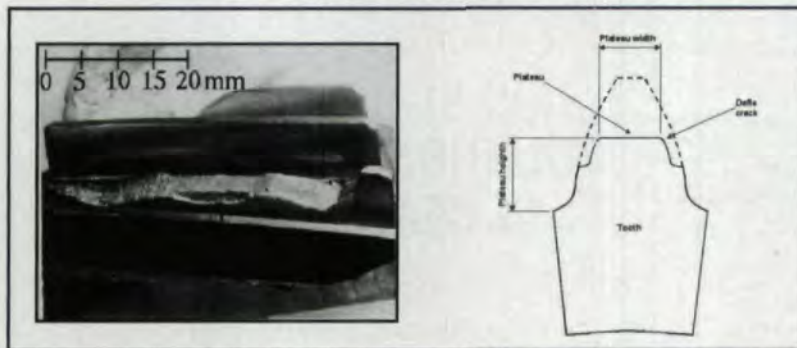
A typical Tooth Interior Fatigue Fracture (TIFF) and a schematic of a TIFF.
